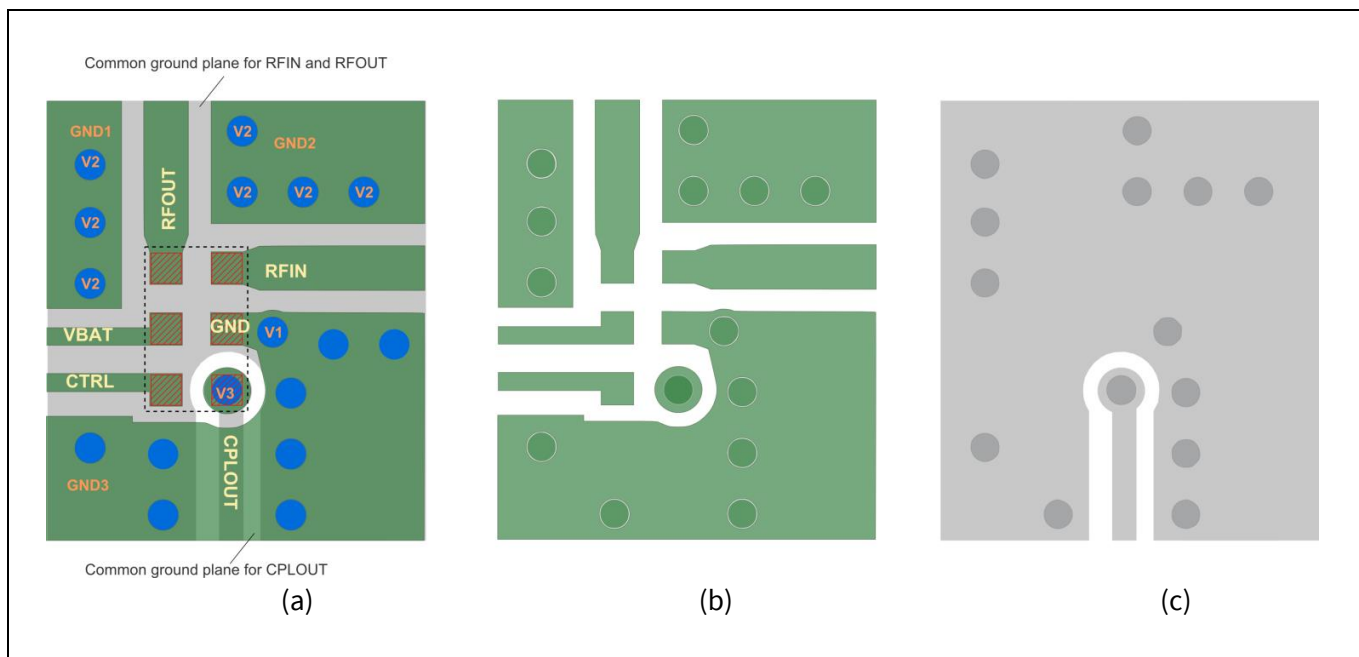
Recommended board layout for design-in of BGC100GN6 coupler IC: (a) – layout overly, (b) – top metal layer, (c) – bottom metal layer
